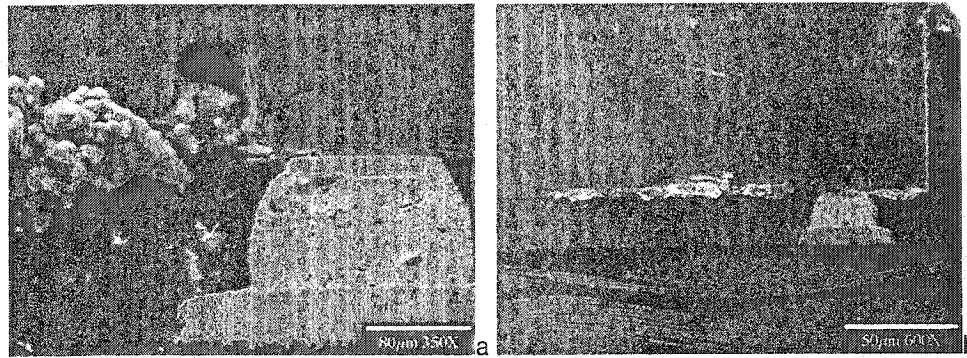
Failure in the Al trace and Si die (a) M4, solder joint A (b) M7, solder joint A
